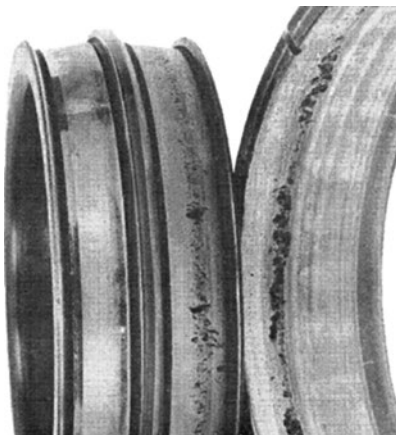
A rolling-element bearing failure in a gearbox due to improper internal clearance. (Failure occurred in less than 100 hours of running time.)
